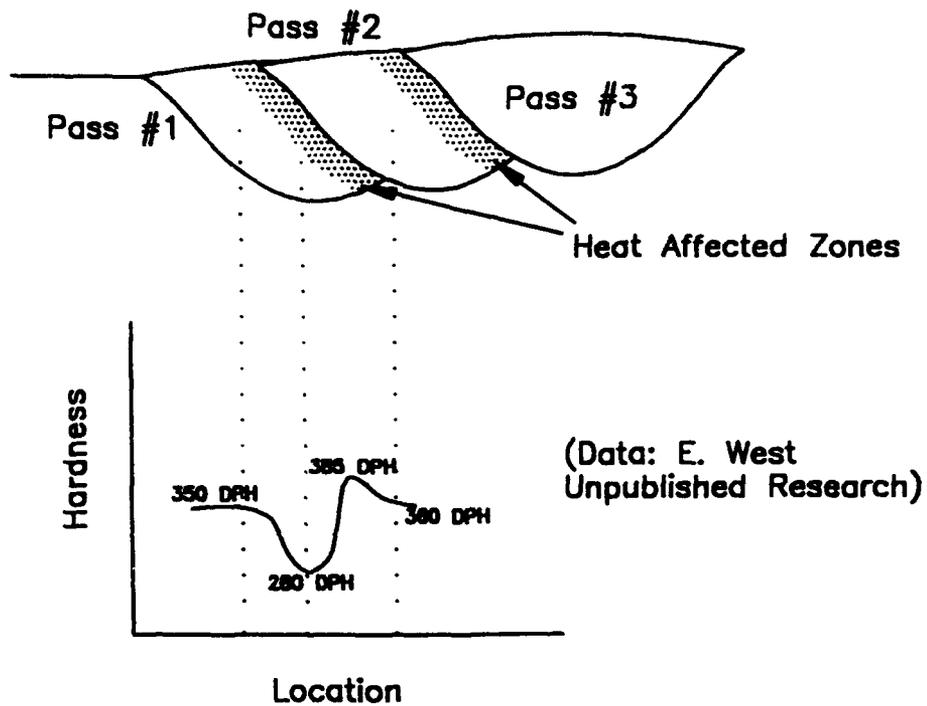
Localized drops in weld metal hardness in the reheated weld metal of an earlier deposited copper strengthened weld bead during multi-pass welding.
